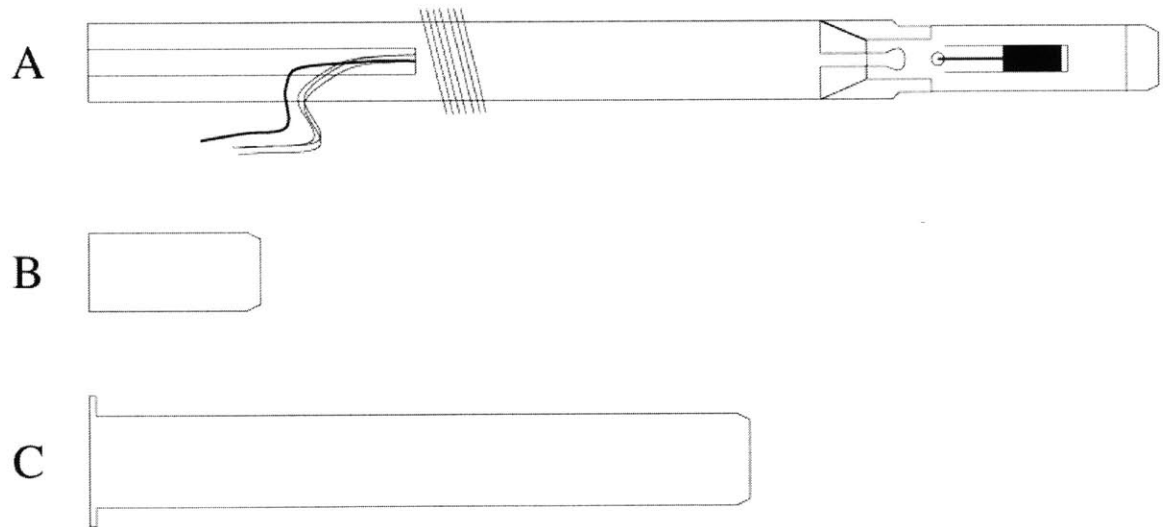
The probe body was composed of three main parts: the inner core, the insulating sheath, and the outer stainless steel body. (Adapted from E. Quan [37])
